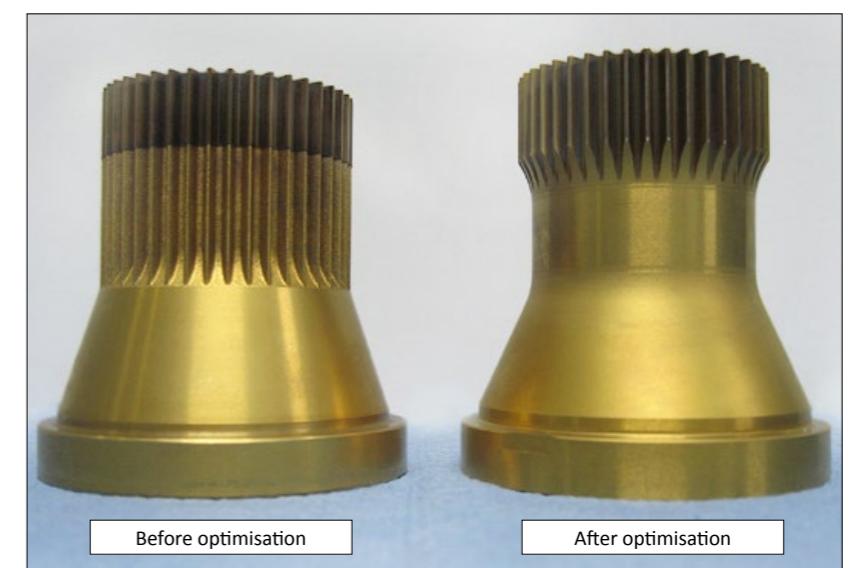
The original design of the punch was optimised to remove the unnecessary and expensive spark eroded form (Courtesy Mechworx Ltd)
